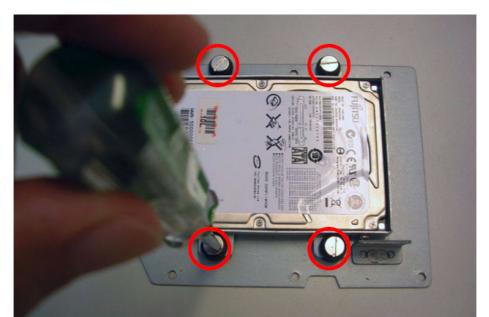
Use the HDD damper screws to assemble the HDD door and HDD frame
